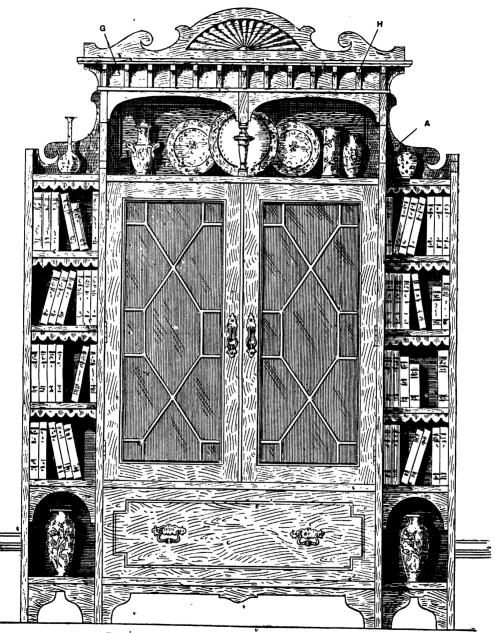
Front Elevation of Cabinet-bookcase and Bedstead.
